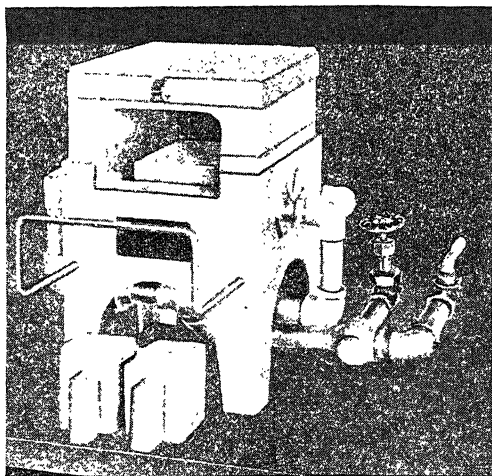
Convertible bench forge. Has removable cover brick, and front and back bricks easily handled by tongs. Has adjustable rack for work support. May be used as oven furnace for heat treating carbon or high-speed steel. (Courtesy of American Gas Furnace Company, Elizabeth, N. J.)
